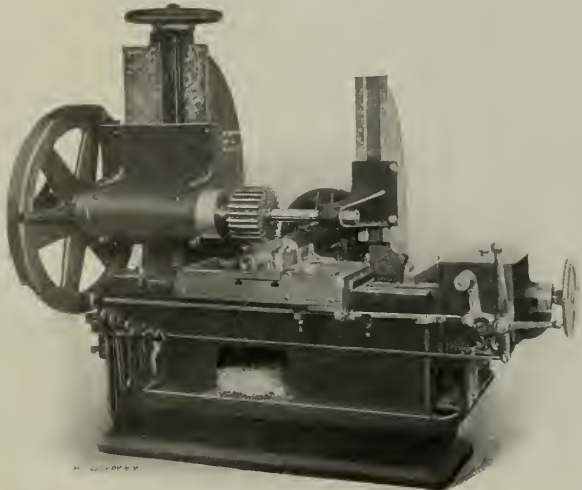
Automatic Pinion Cutting Machine. Front View.
